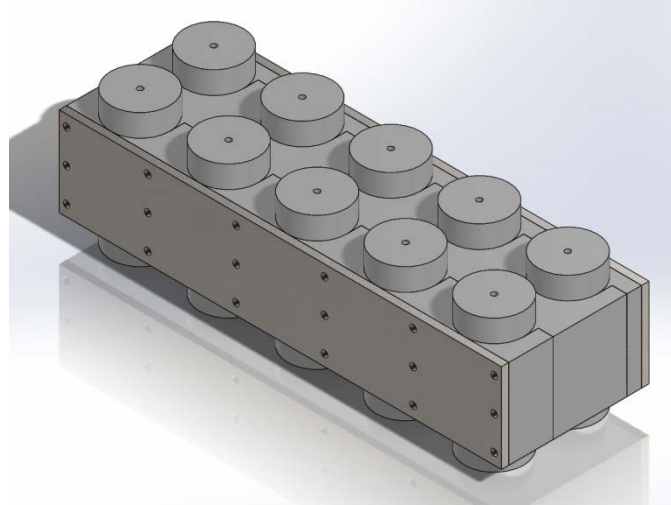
Mold assembly used to produce the 10-pack 1 in diameter, 1 in high cylindrical samples
